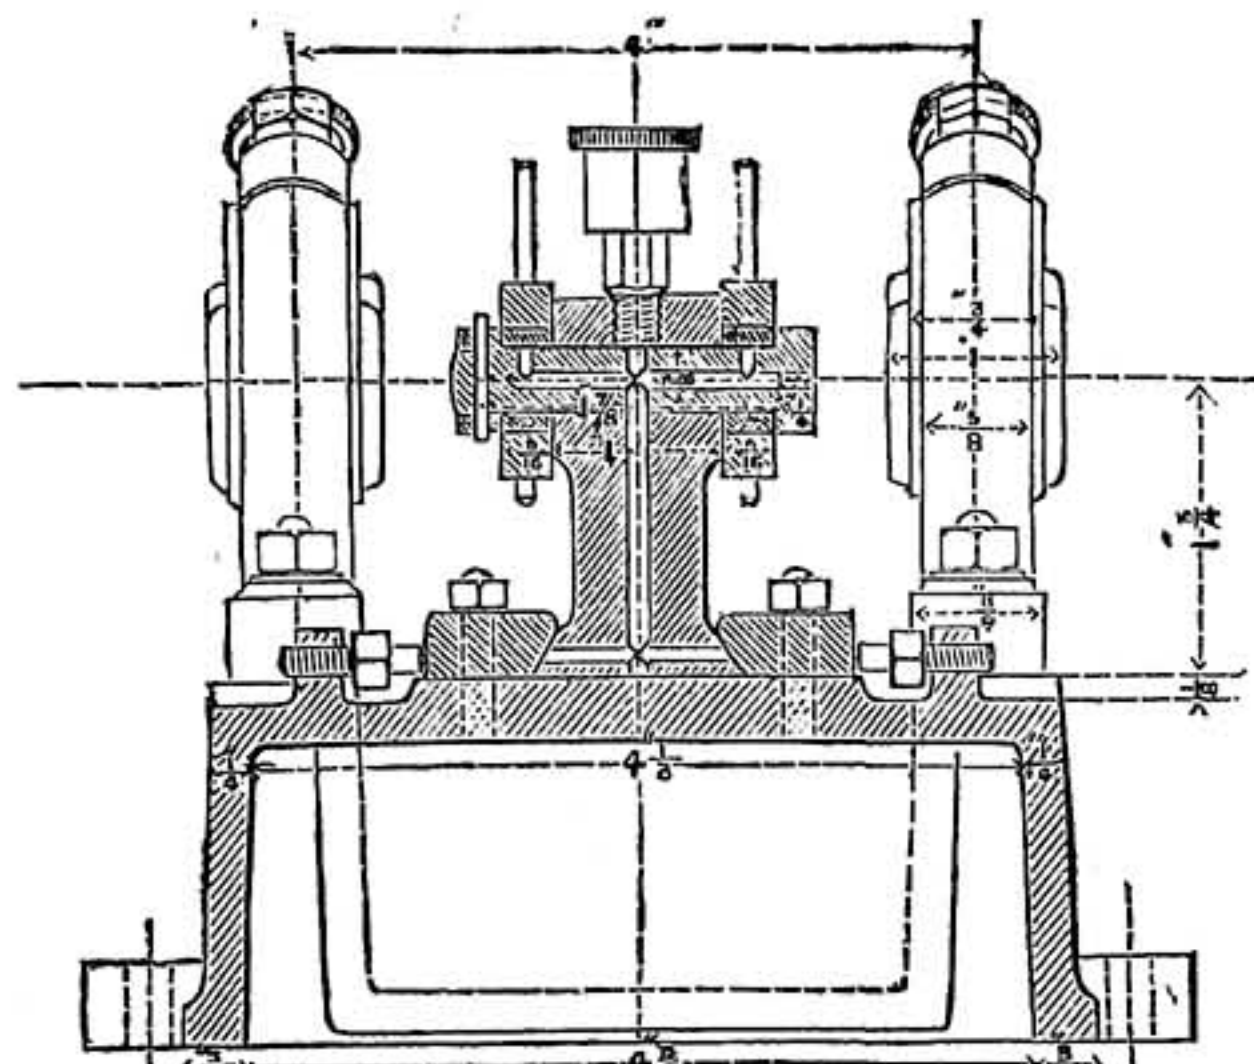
Cross Section through Bed-Plate, Cross-Head, Slipper-Guide, and Guide-Plates.
